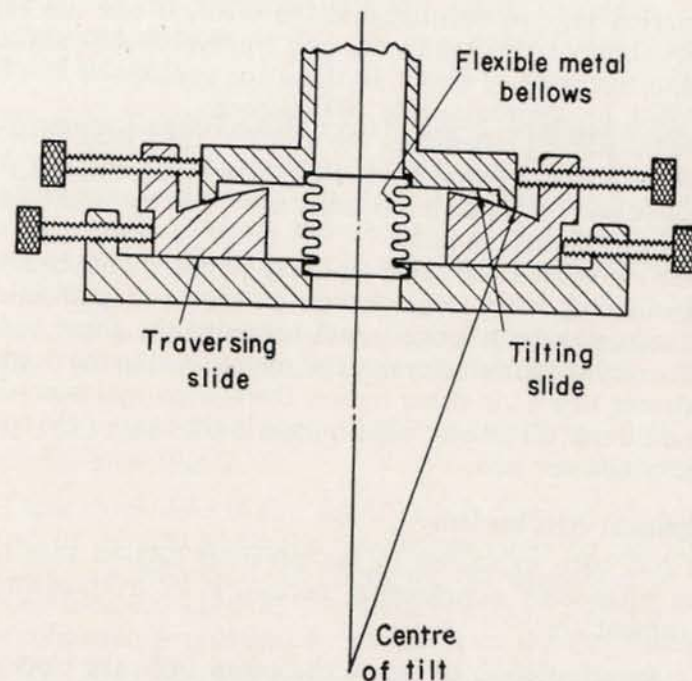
Mechanical alignment section for electron gun (M-V. E.M.3).
